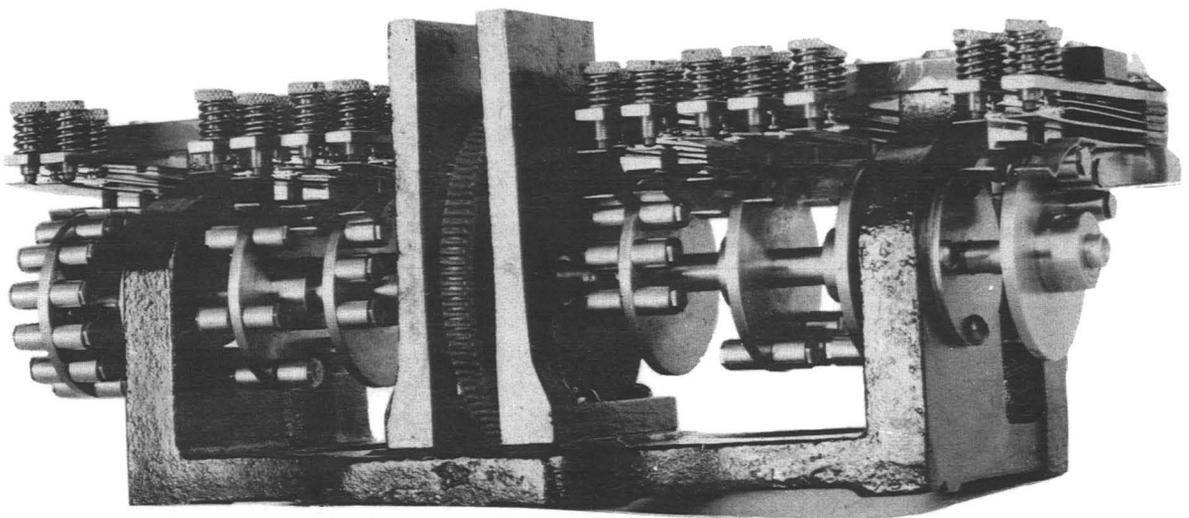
Low-speed Interrupter (Metal Cam Type)
